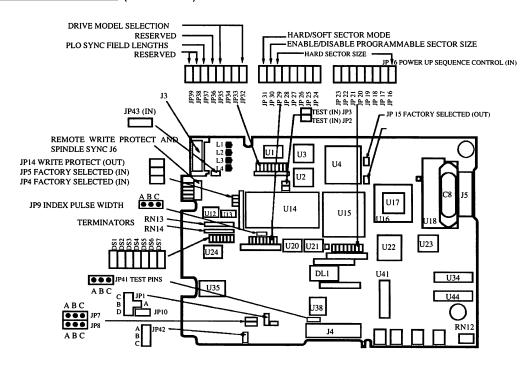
Drive Jumper Options (PCB P/N 1015468)
